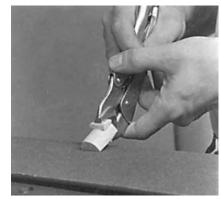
To safely sand small workpieces, hold them with a pair of pliers, clamp them in a drill chuck, or use a special fixture you make yourself.
